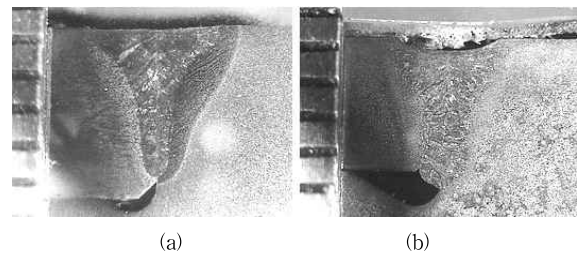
Cross-sections; (a) annulus gear, (b) hub clutch assembly
